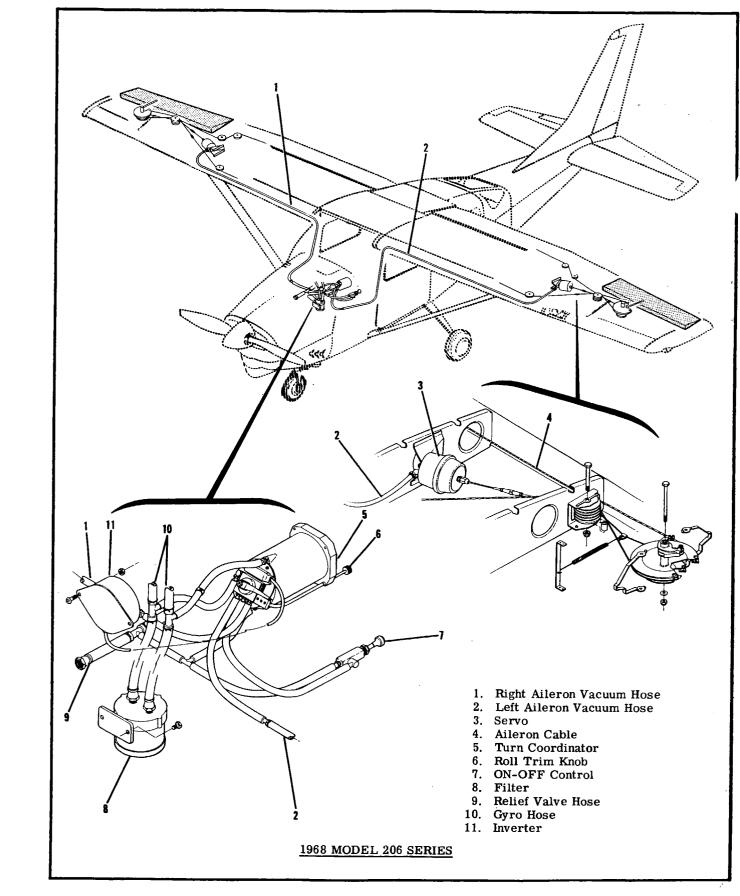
Wing Leveler Control System (Sheet 1 of 2)
